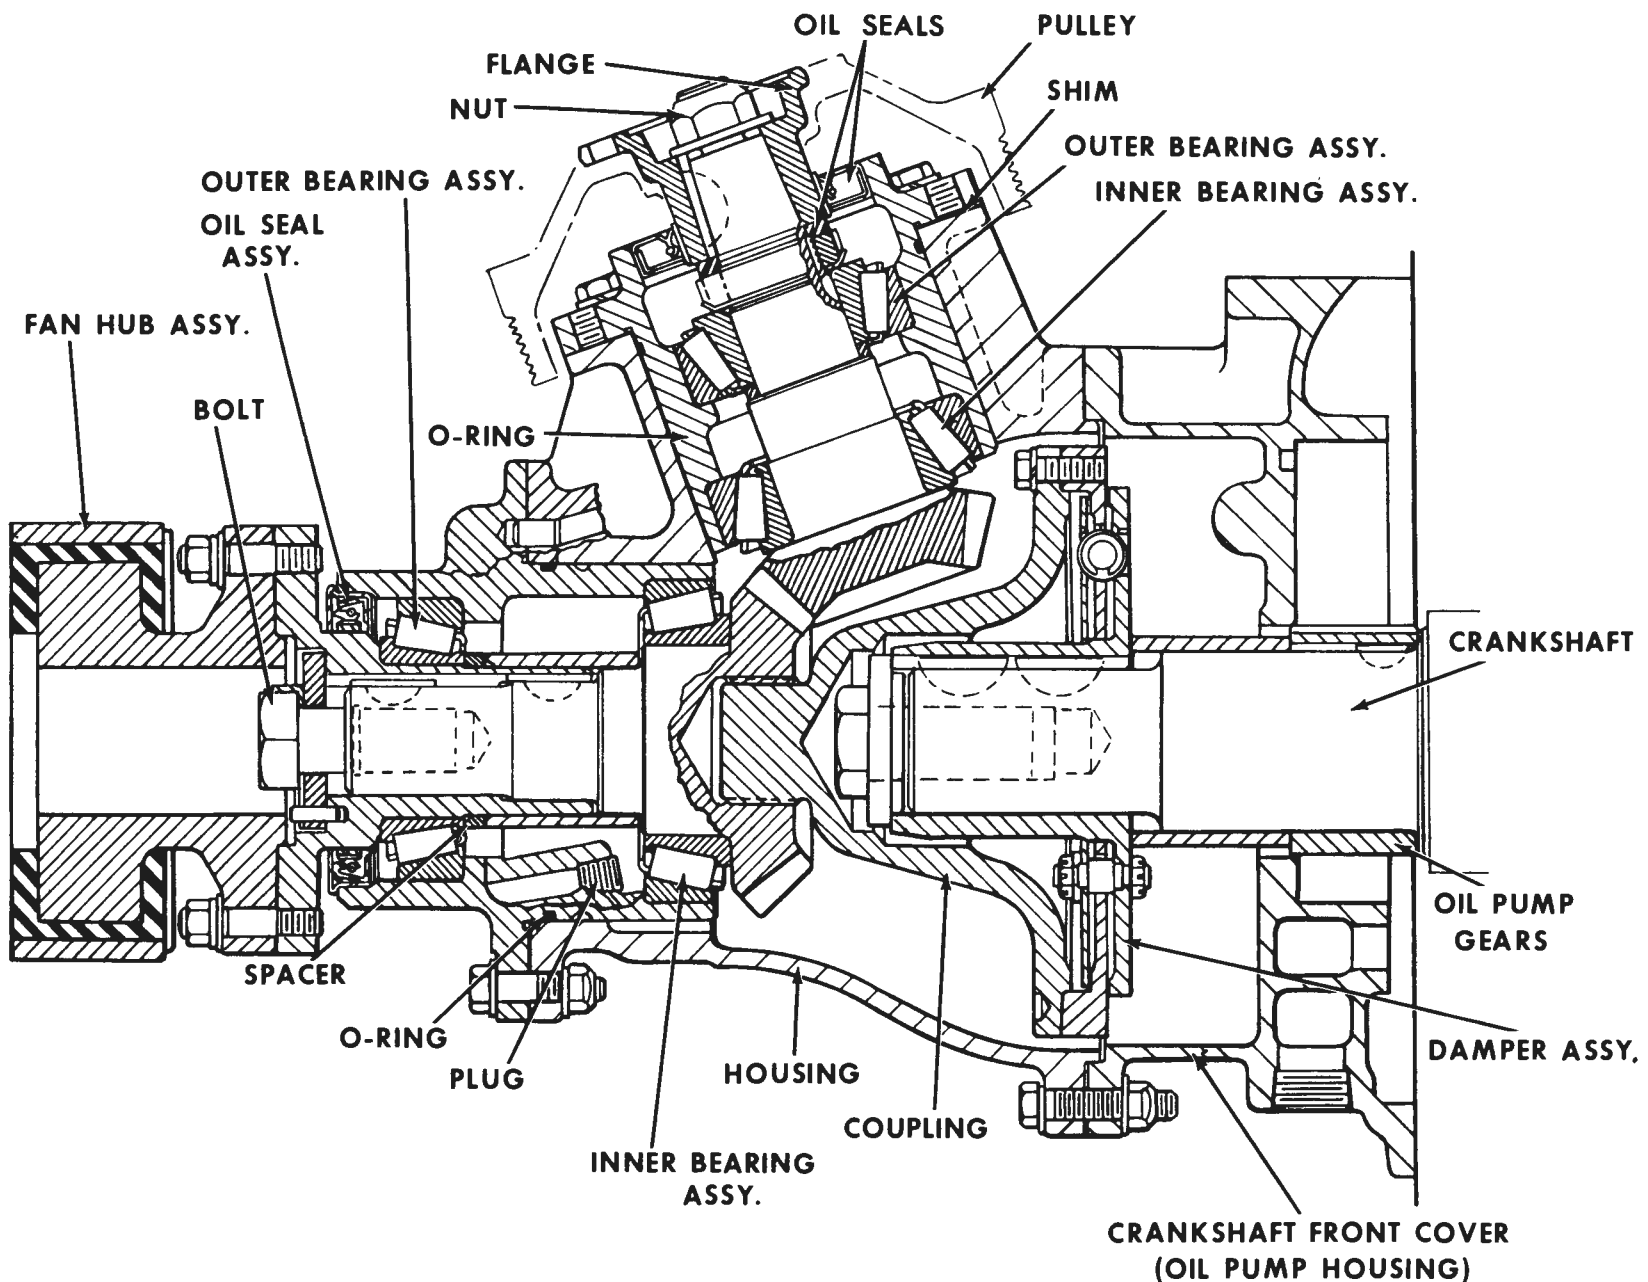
DIRECT DRIVE FAN ASSEMBLY
